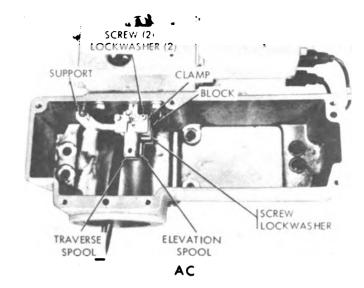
Gunner's control disassembly or assembly (5 of 6).
